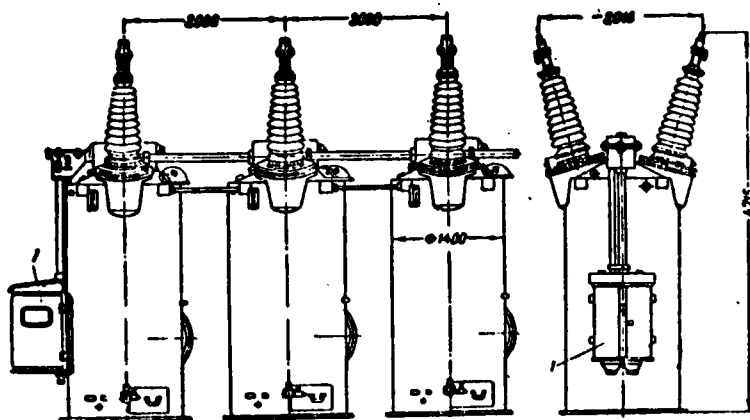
An oil breaker of the type MKP-110, on 110 kV, 600 A, 3500 MVA.
